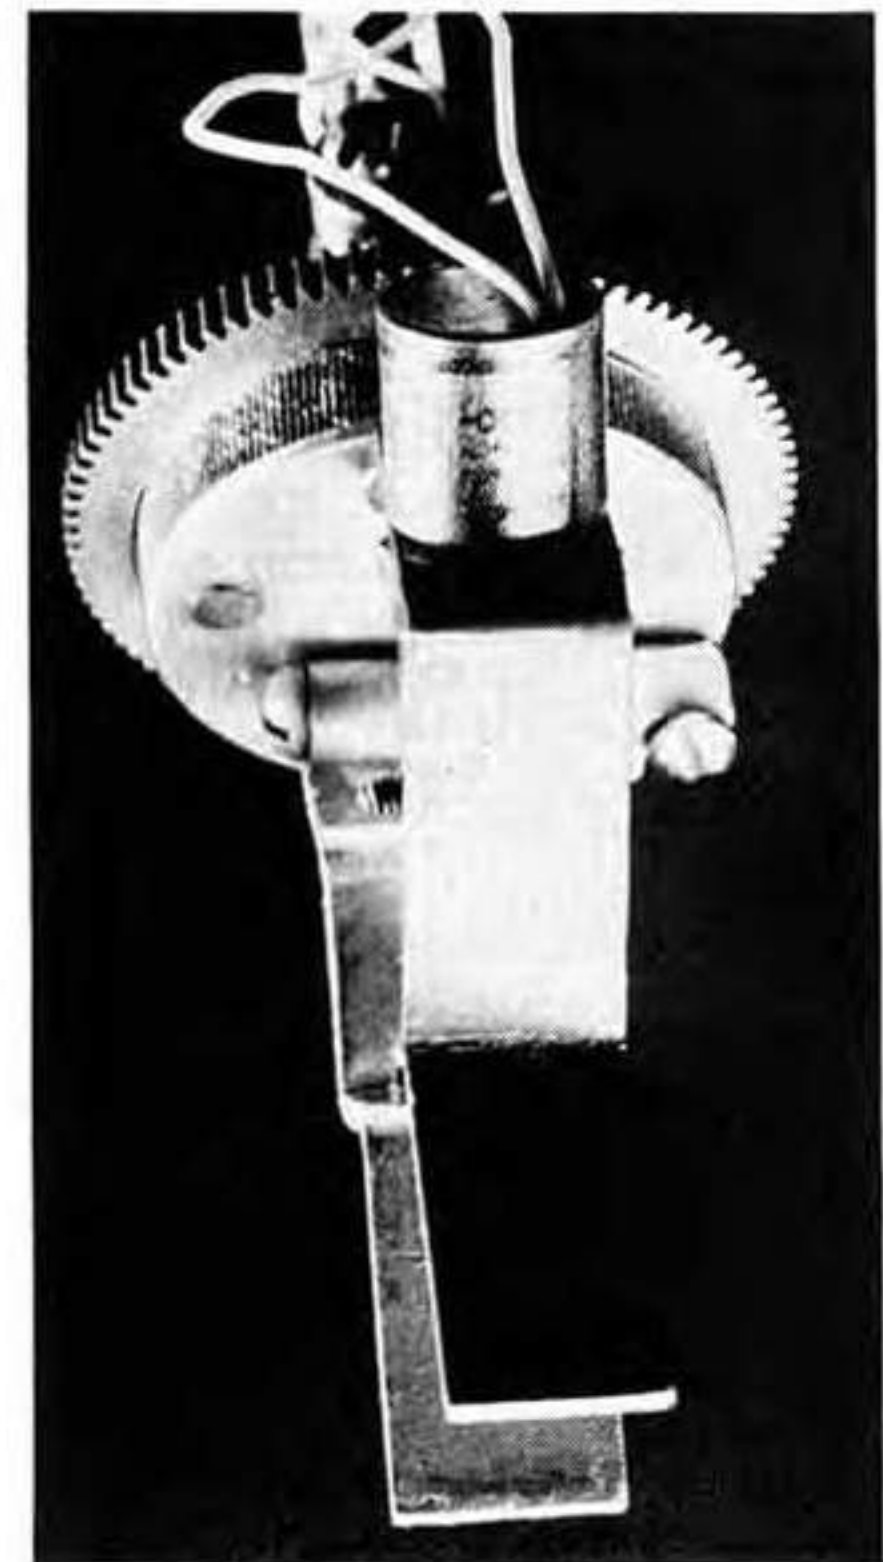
COMPLETED FINGER-TYPE end-effector. Gear is non-functional, but adds to appearance.
